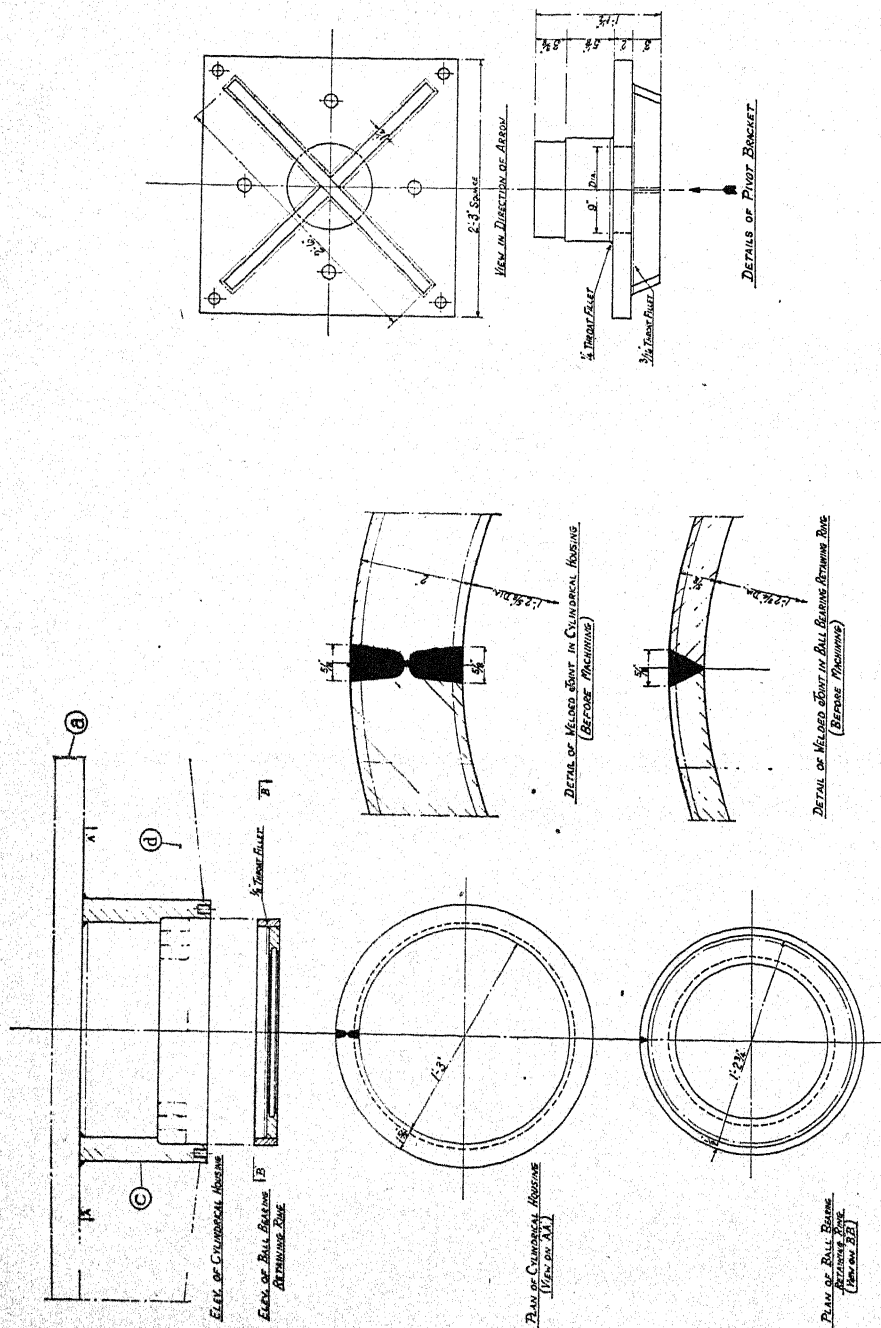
, (left), Cylindrical housing for ball bearing. Fig. 6, (right), Details of pivot bracket locating the center ball bearing.
